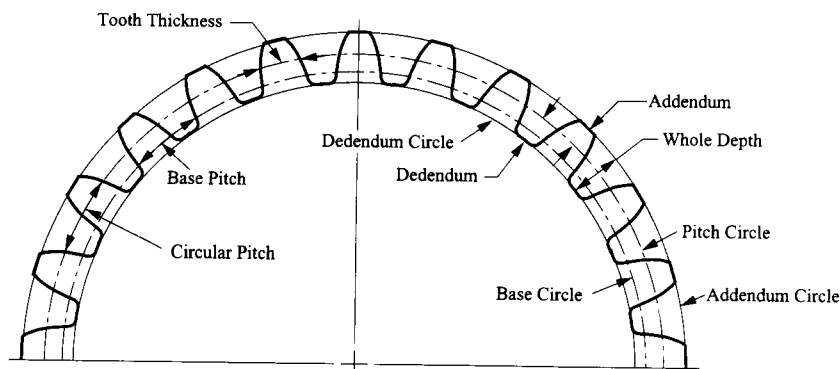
Gear tooth in-plane geometry terminology.
